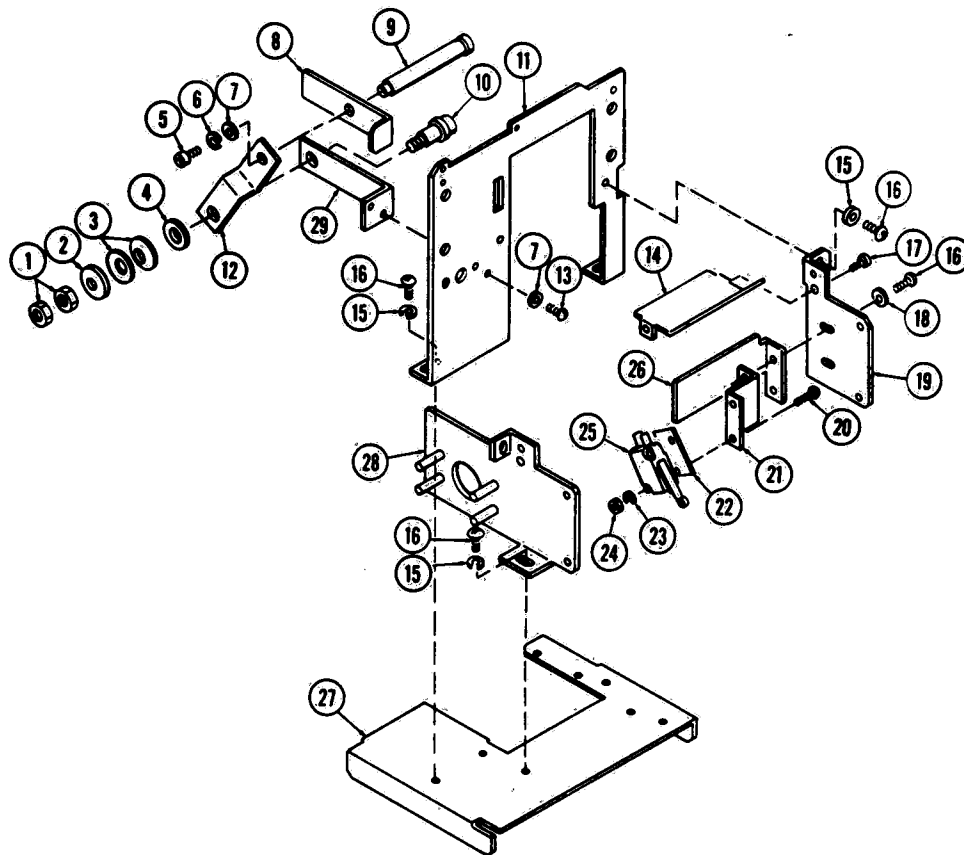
B. PRINTCON PRINTER ASSEMBLY (Part 2 of 2, Units After 6/85).
